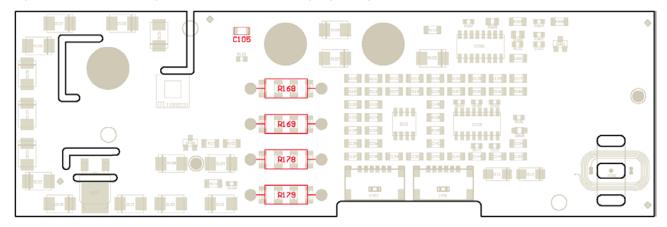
Assembly drawing of 1SP0635D2S1 with highlighted gate resistors
